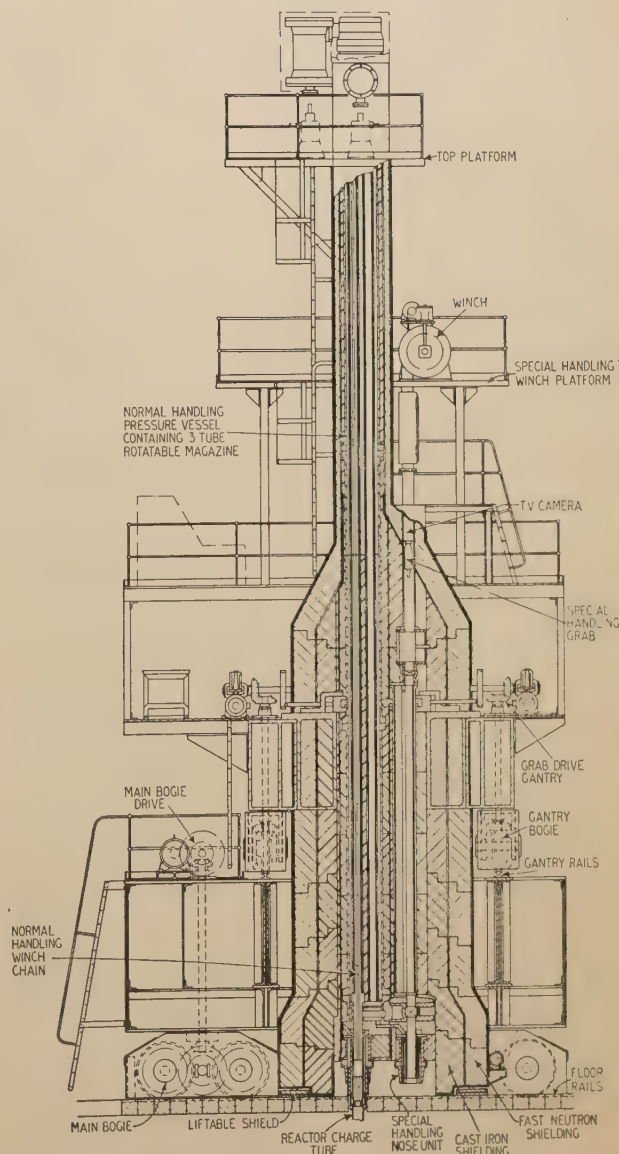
Cross-section of the 400 ton 65ft high refuelling machine. Access to the nose unit is gained by pneumatically operated doors which form part of the lower shielding
